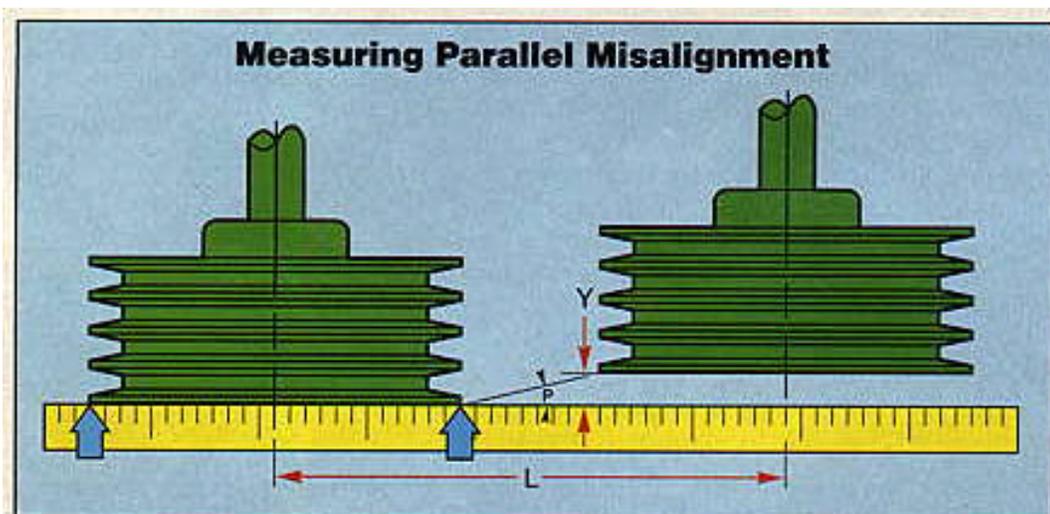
Parallel misalignment is corrected by adjusting sheaves and sprockets on one or both shafts in a drive train.
